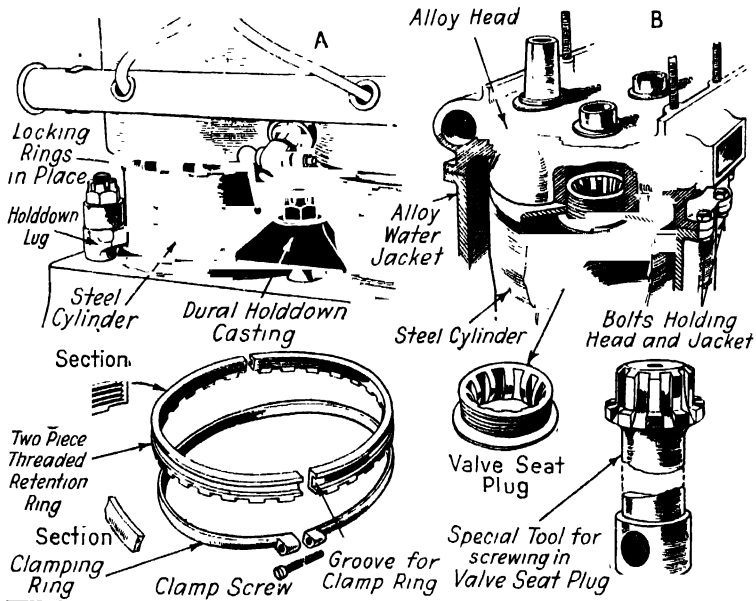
Sketches Showing Method of Holding Cylinders of "Nimbus" Engine to Crankcase and Water Jacket to Cylinder at A. B Shows Valve Seat Plugs Holding Cylinder to the Head.
